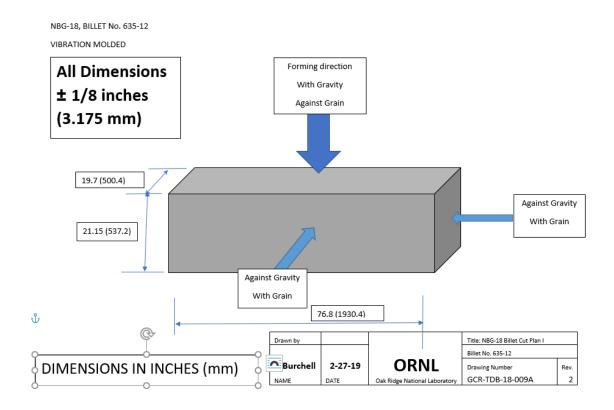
NBG-18 billet no. 635-12 cut plan (drawing A).
